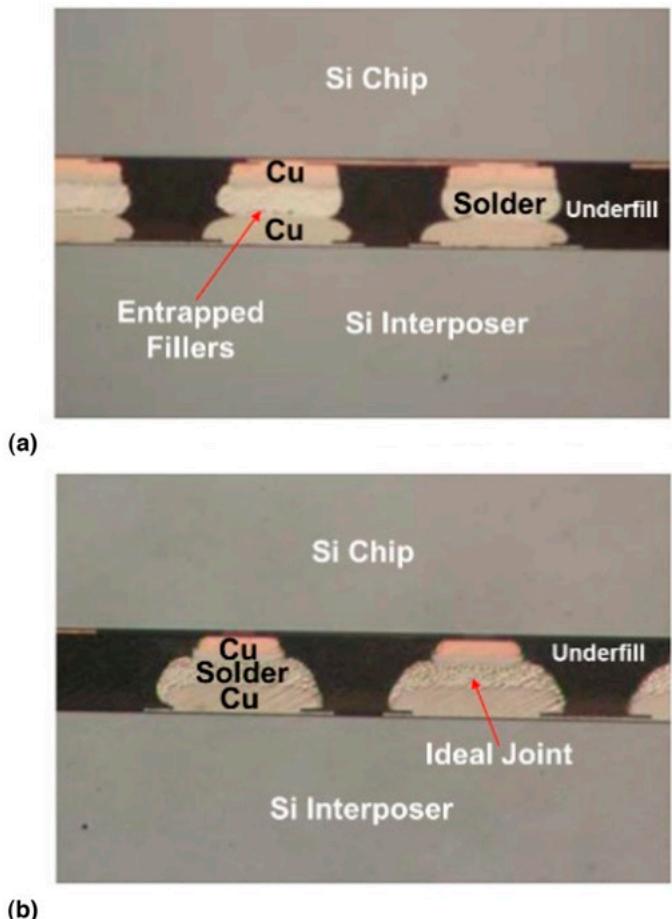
DBHi TCB with NCP. (a) Solder joint with entrapped fillers. (b) Optimal solder joints.
